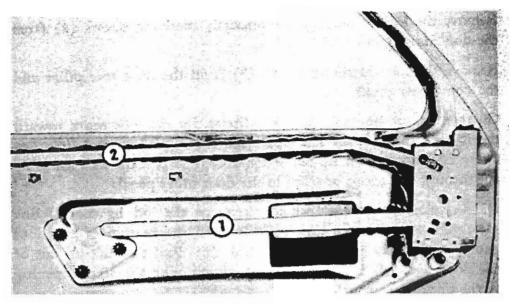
On Rear Doors, Turn the Lock To Disengage the Locking Control Link Before Lowering the Lock.
